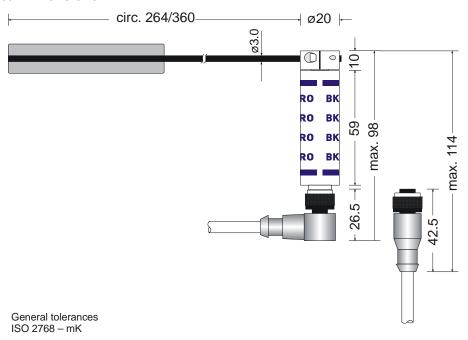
Mechanical Dimensions – Scanner TK8A
